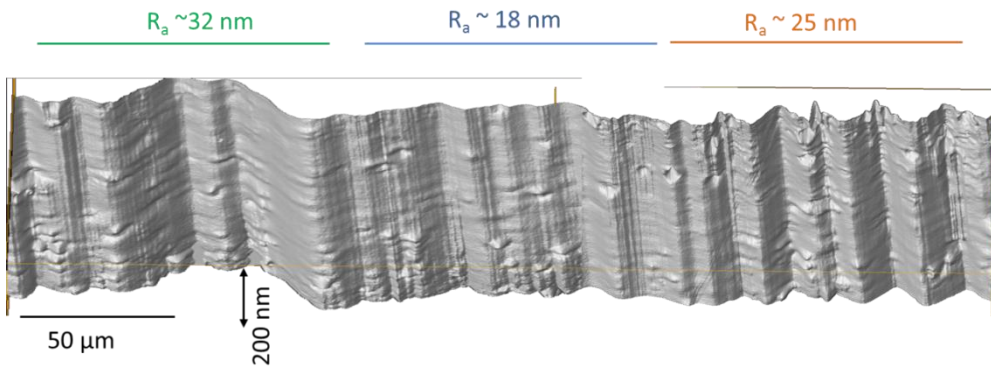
MicroXAM 3D profile of the workpiece shown in Figure 2-1.
